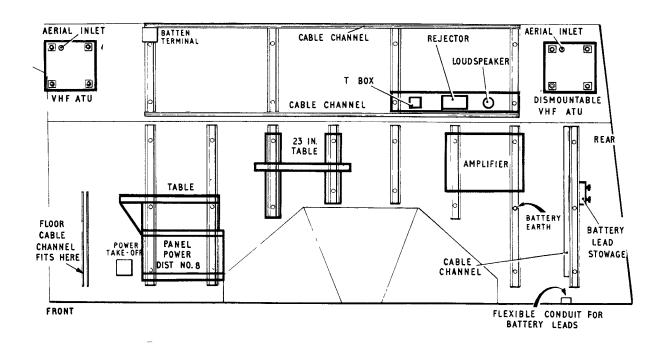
BRACKETS AND EQUIPMENT MOUNTED ON THE RH WALL
